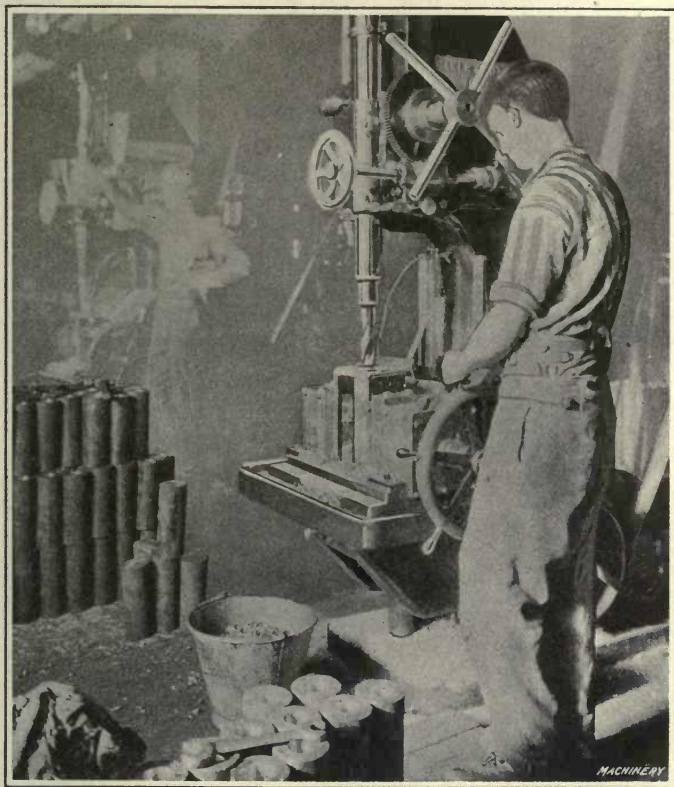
Baker High-power Drilling Machine at Work on British 18-pound High-explosive Shells
